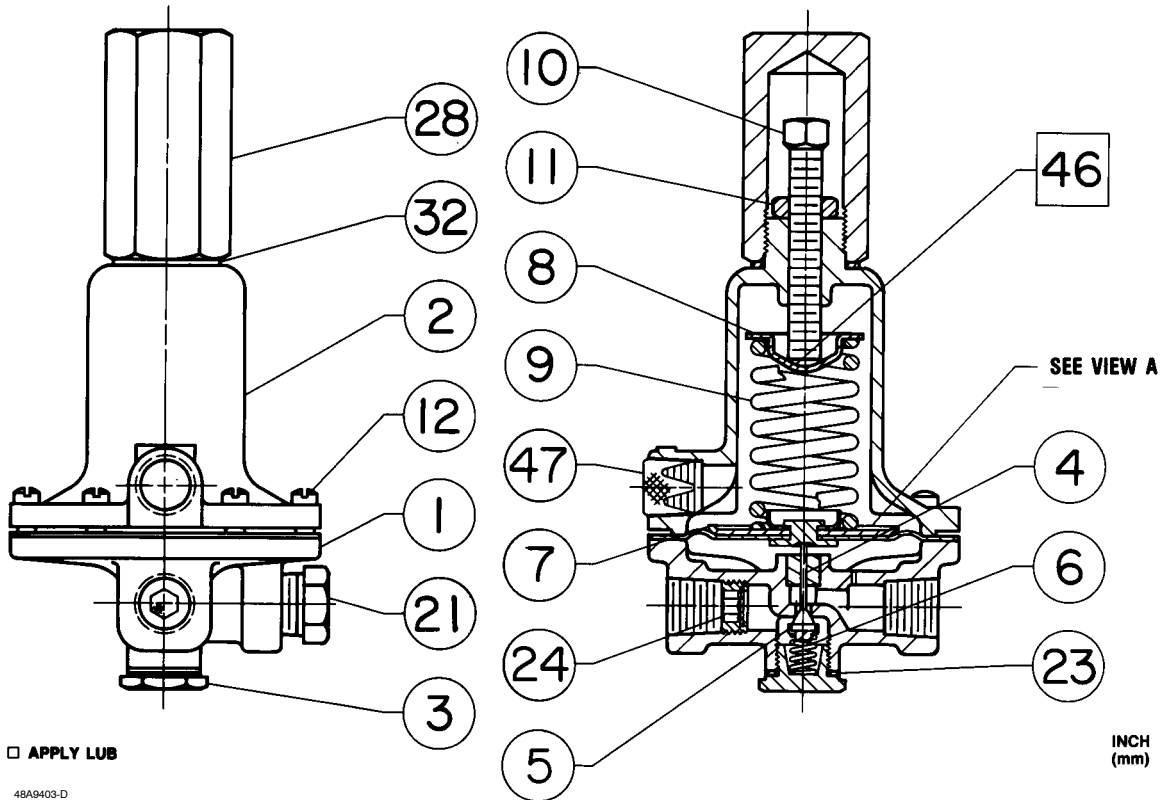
Type 67SS and 67SSR Regulator Assemblies
